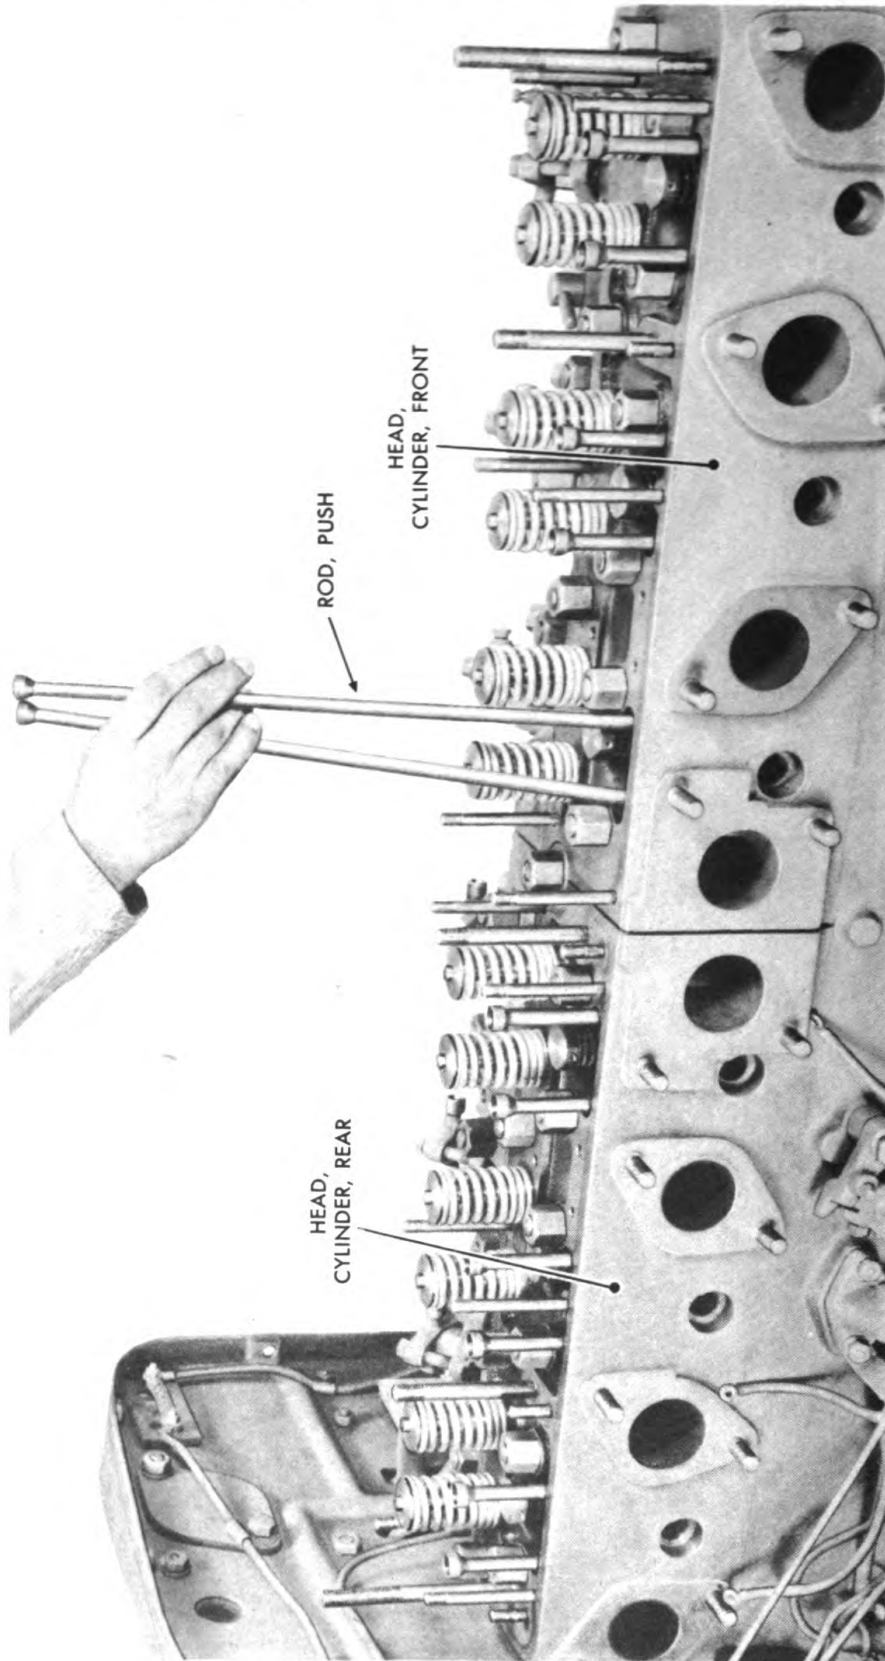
Valve Shaft, Lever Assembly and Housing Removal
